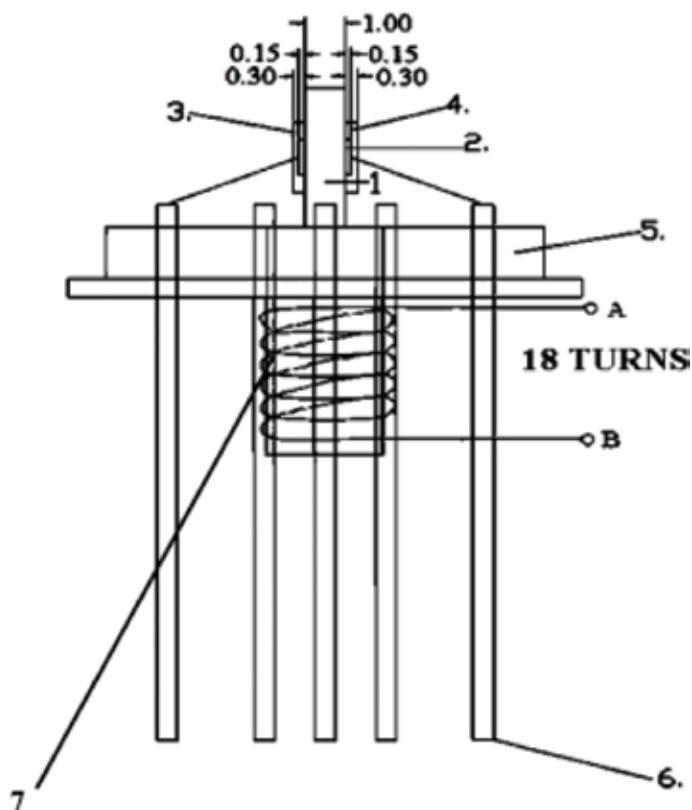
CO₂ sensor, component parts: 1. Ce₂O₂-Y₂O₃ disc; 2. Gold electrode, thin film deposition of Au, in the form of the disc; 3. Ag micro-wire connections; 4. The positioning piece; 5. TO-8 package plated base; 6. The pins; 7. A, B terminals of 18 turns heating resistance.
